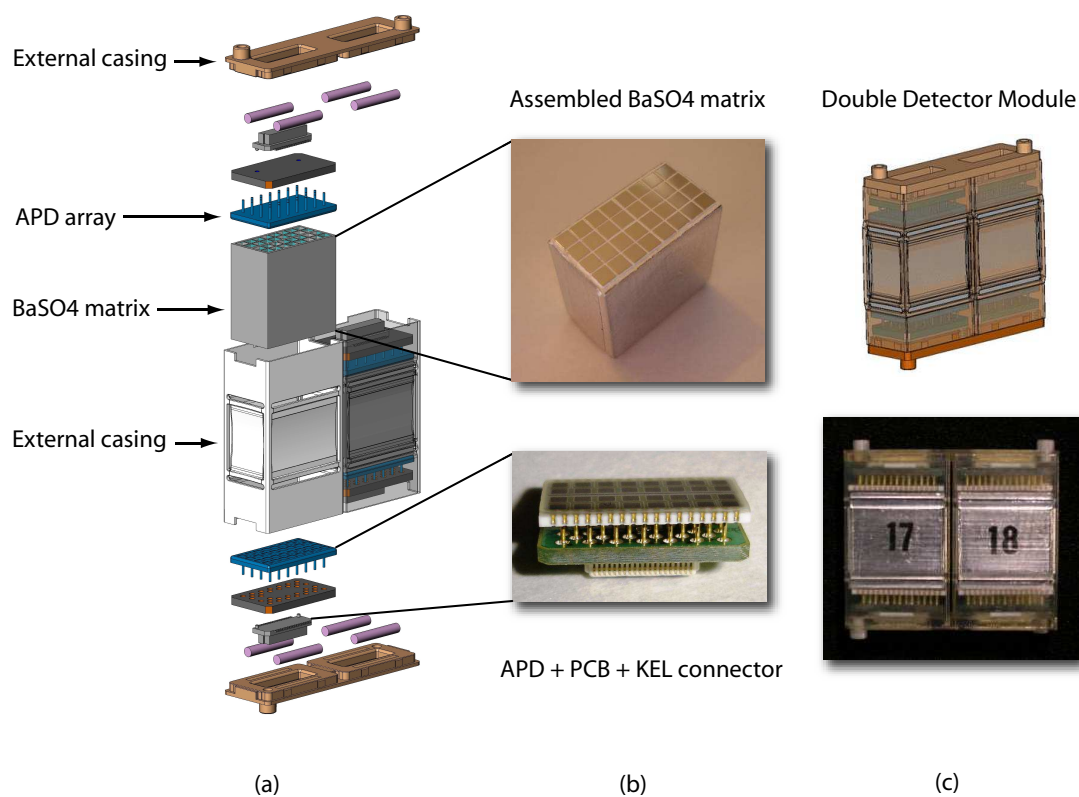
(a) Exploded detector module scheme; (b) APD mounted on a PCB (with KEL connector); (c) photograph of a double module assembled.
